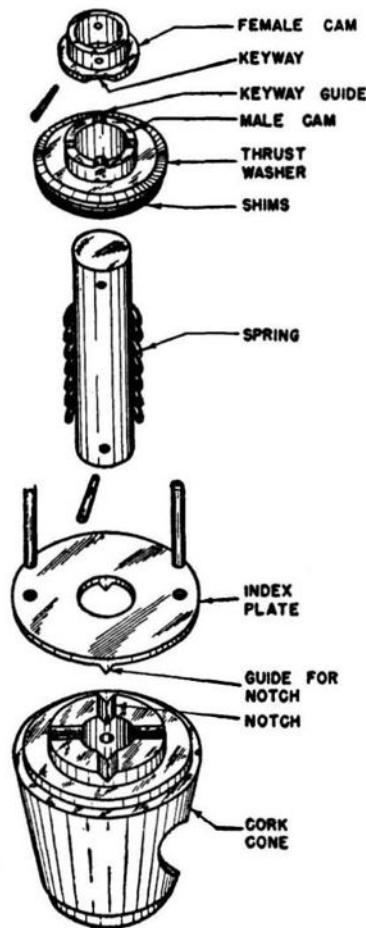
Friction release cam for cork-cone type of fuel selector valve.
